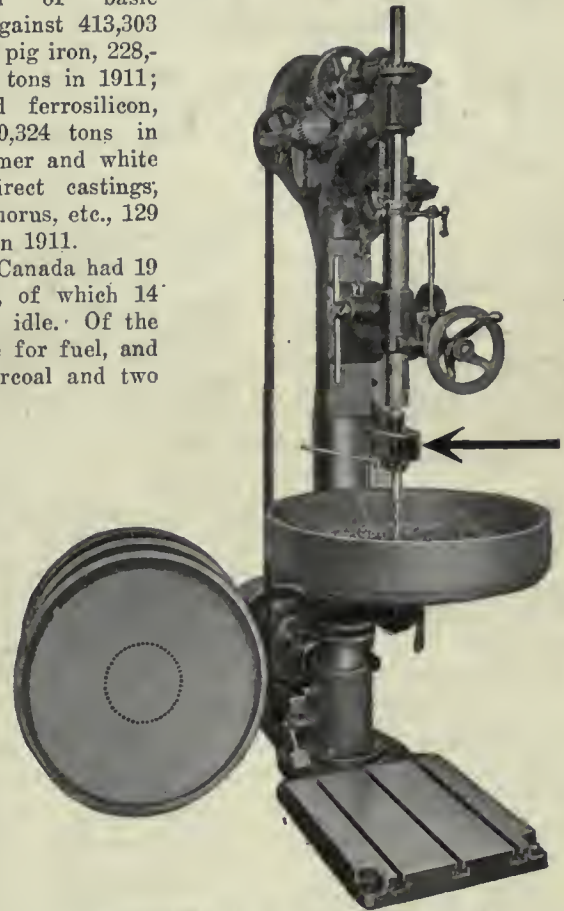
EXAMPLE OF DRILLING 7-16 IN. HOLES IN BOILER HEADS 11-16 IN. THICK.
